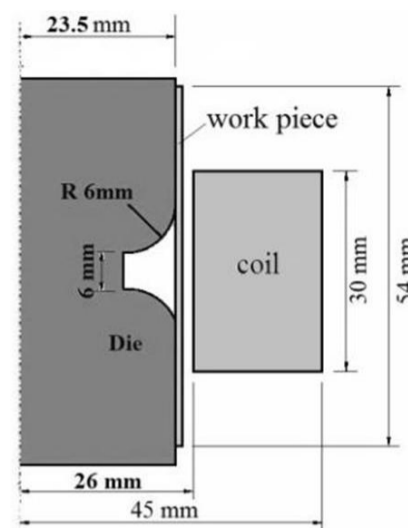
Axi-Symmetry Schematic of workpiece, coil and die in inside bead forming
